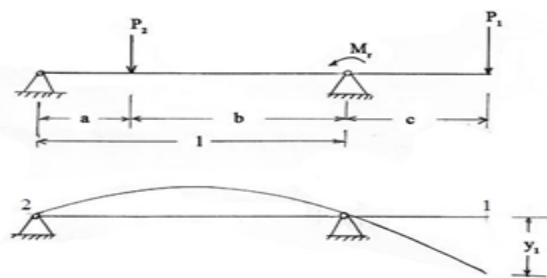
Deflected Axis of the Spindle due to Bending Forces
